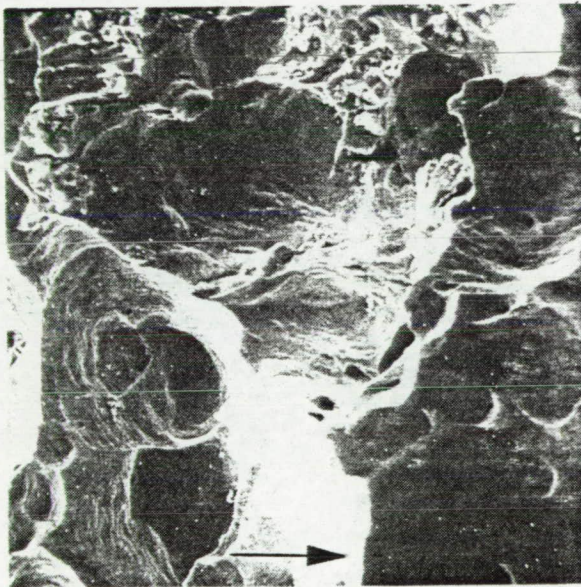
Macrophotographs of fractured samples a) cold worked condition.
